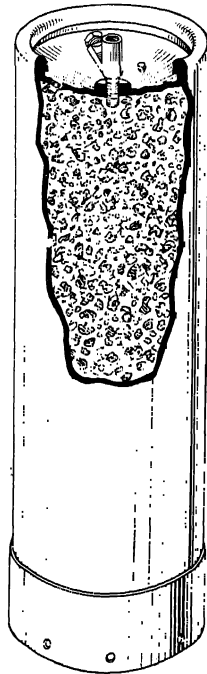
Cutaway section of an acetylene tank. (Courtesy of Linde Air Products Co.)
